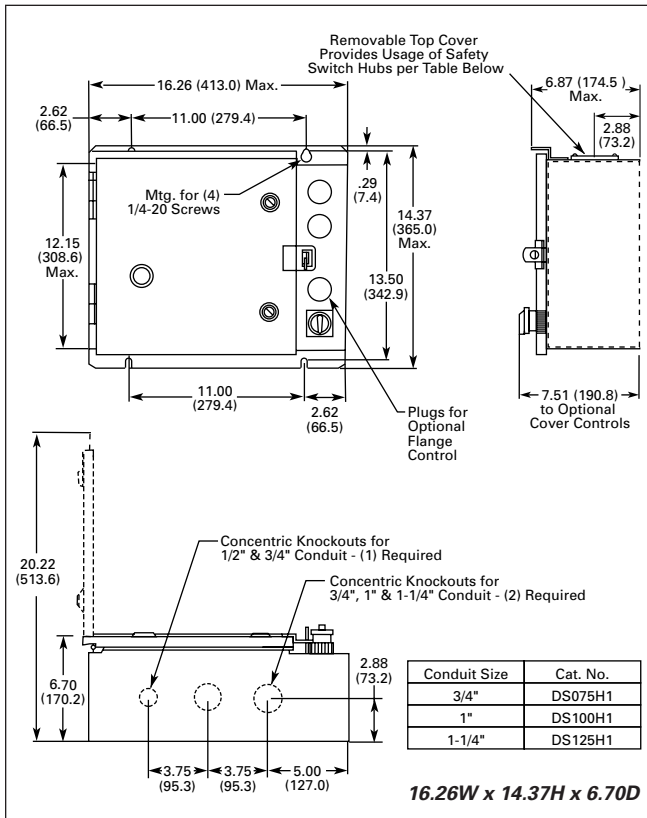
Box 7, Type 3R — Approximate Dimensions in Inches (mm)
